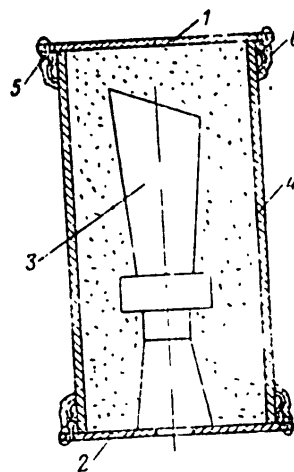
Diagram of Molding Dry Filler and Refractory Pans
